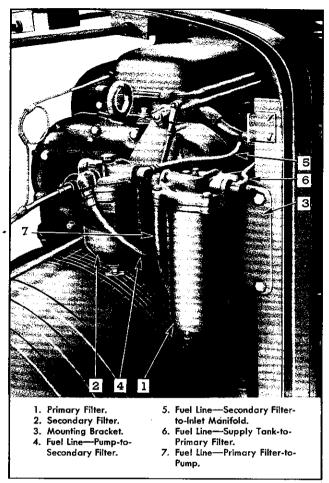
Typical Mounting of Primary and Secondary Fuel
